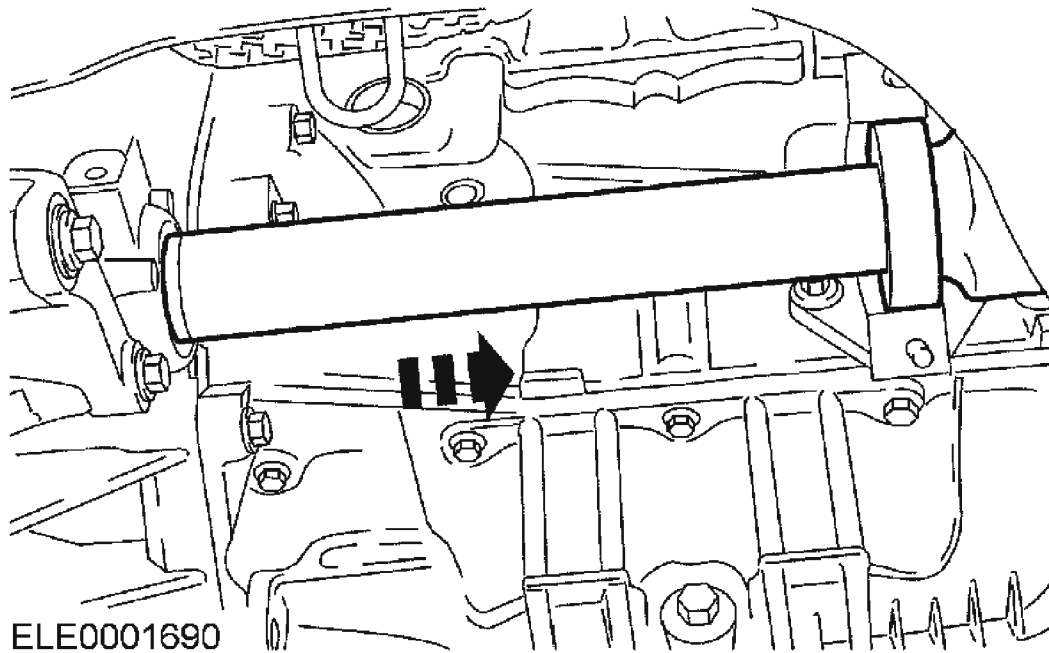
Removing Intermediate Shaft And RH Front Drive Halfshaft Assembly From Transaxle
